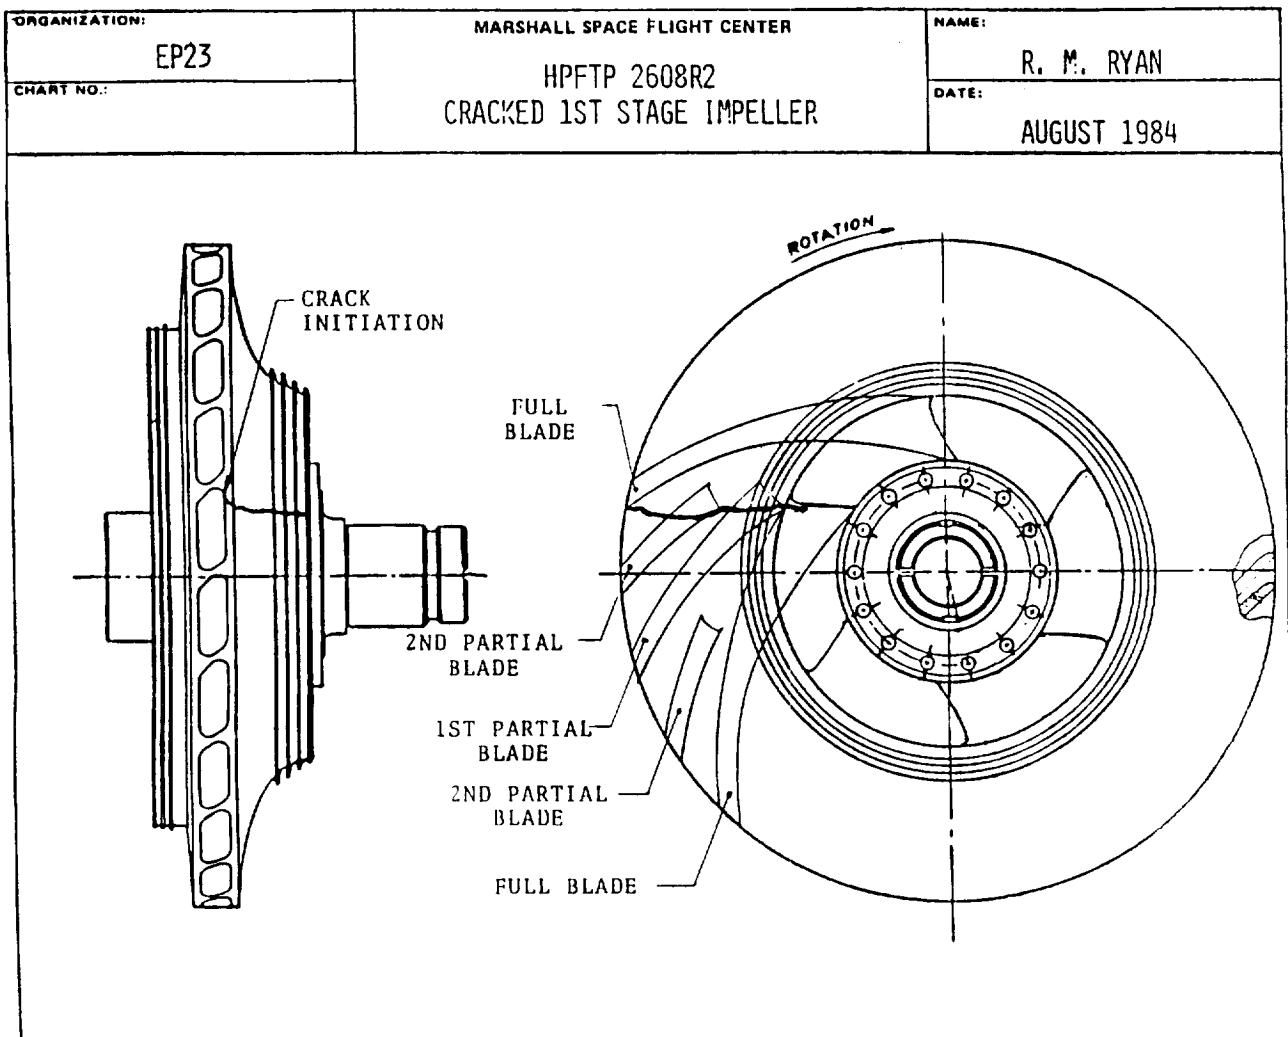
HPFTP 2608R2 Cracked First Stage Impeller
